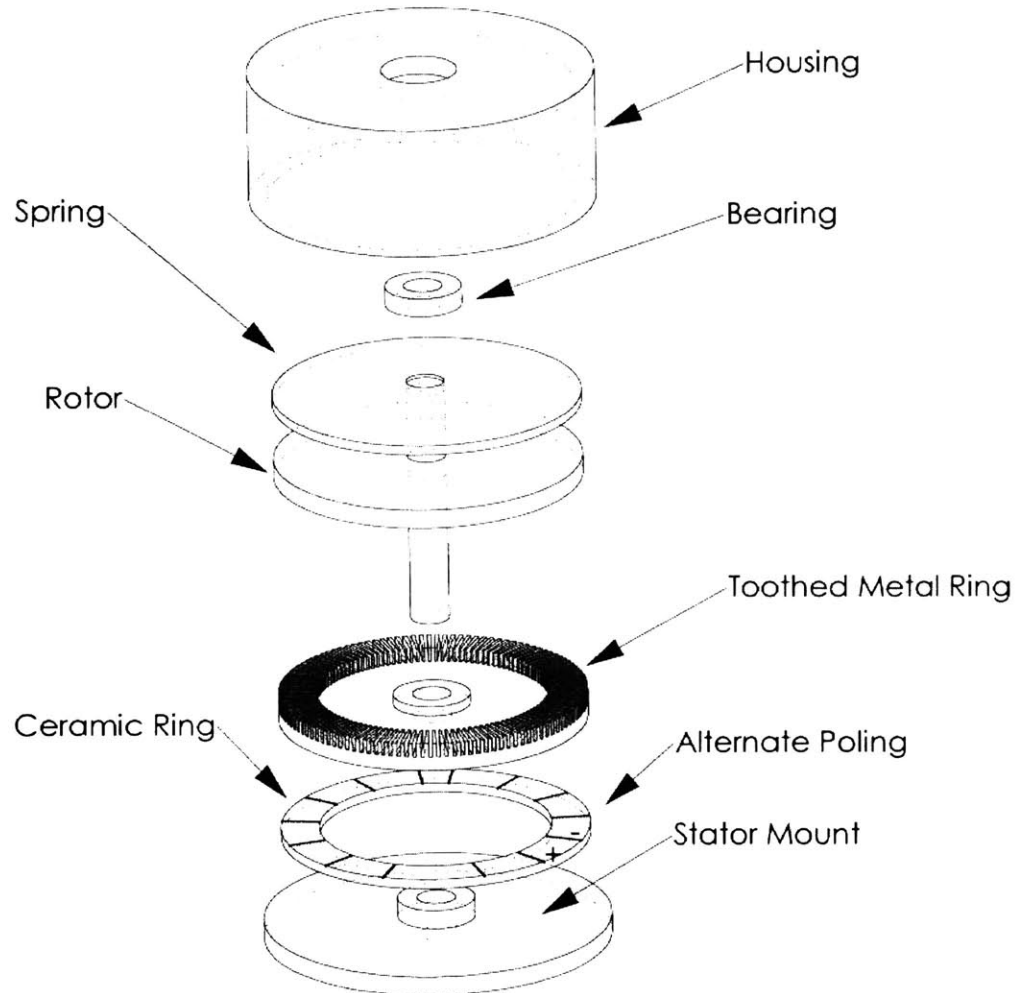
Travelling Wave Ring Ultrasonic Motor - Exploded View
